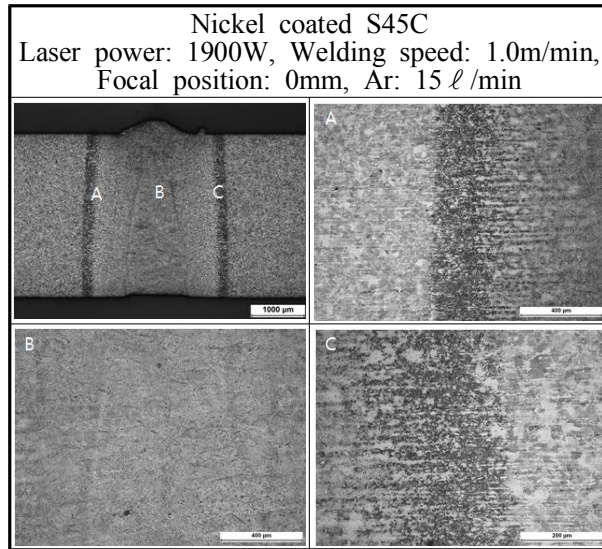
Photographs of melting zone after BOP welding(Nickel Coated S45C)
